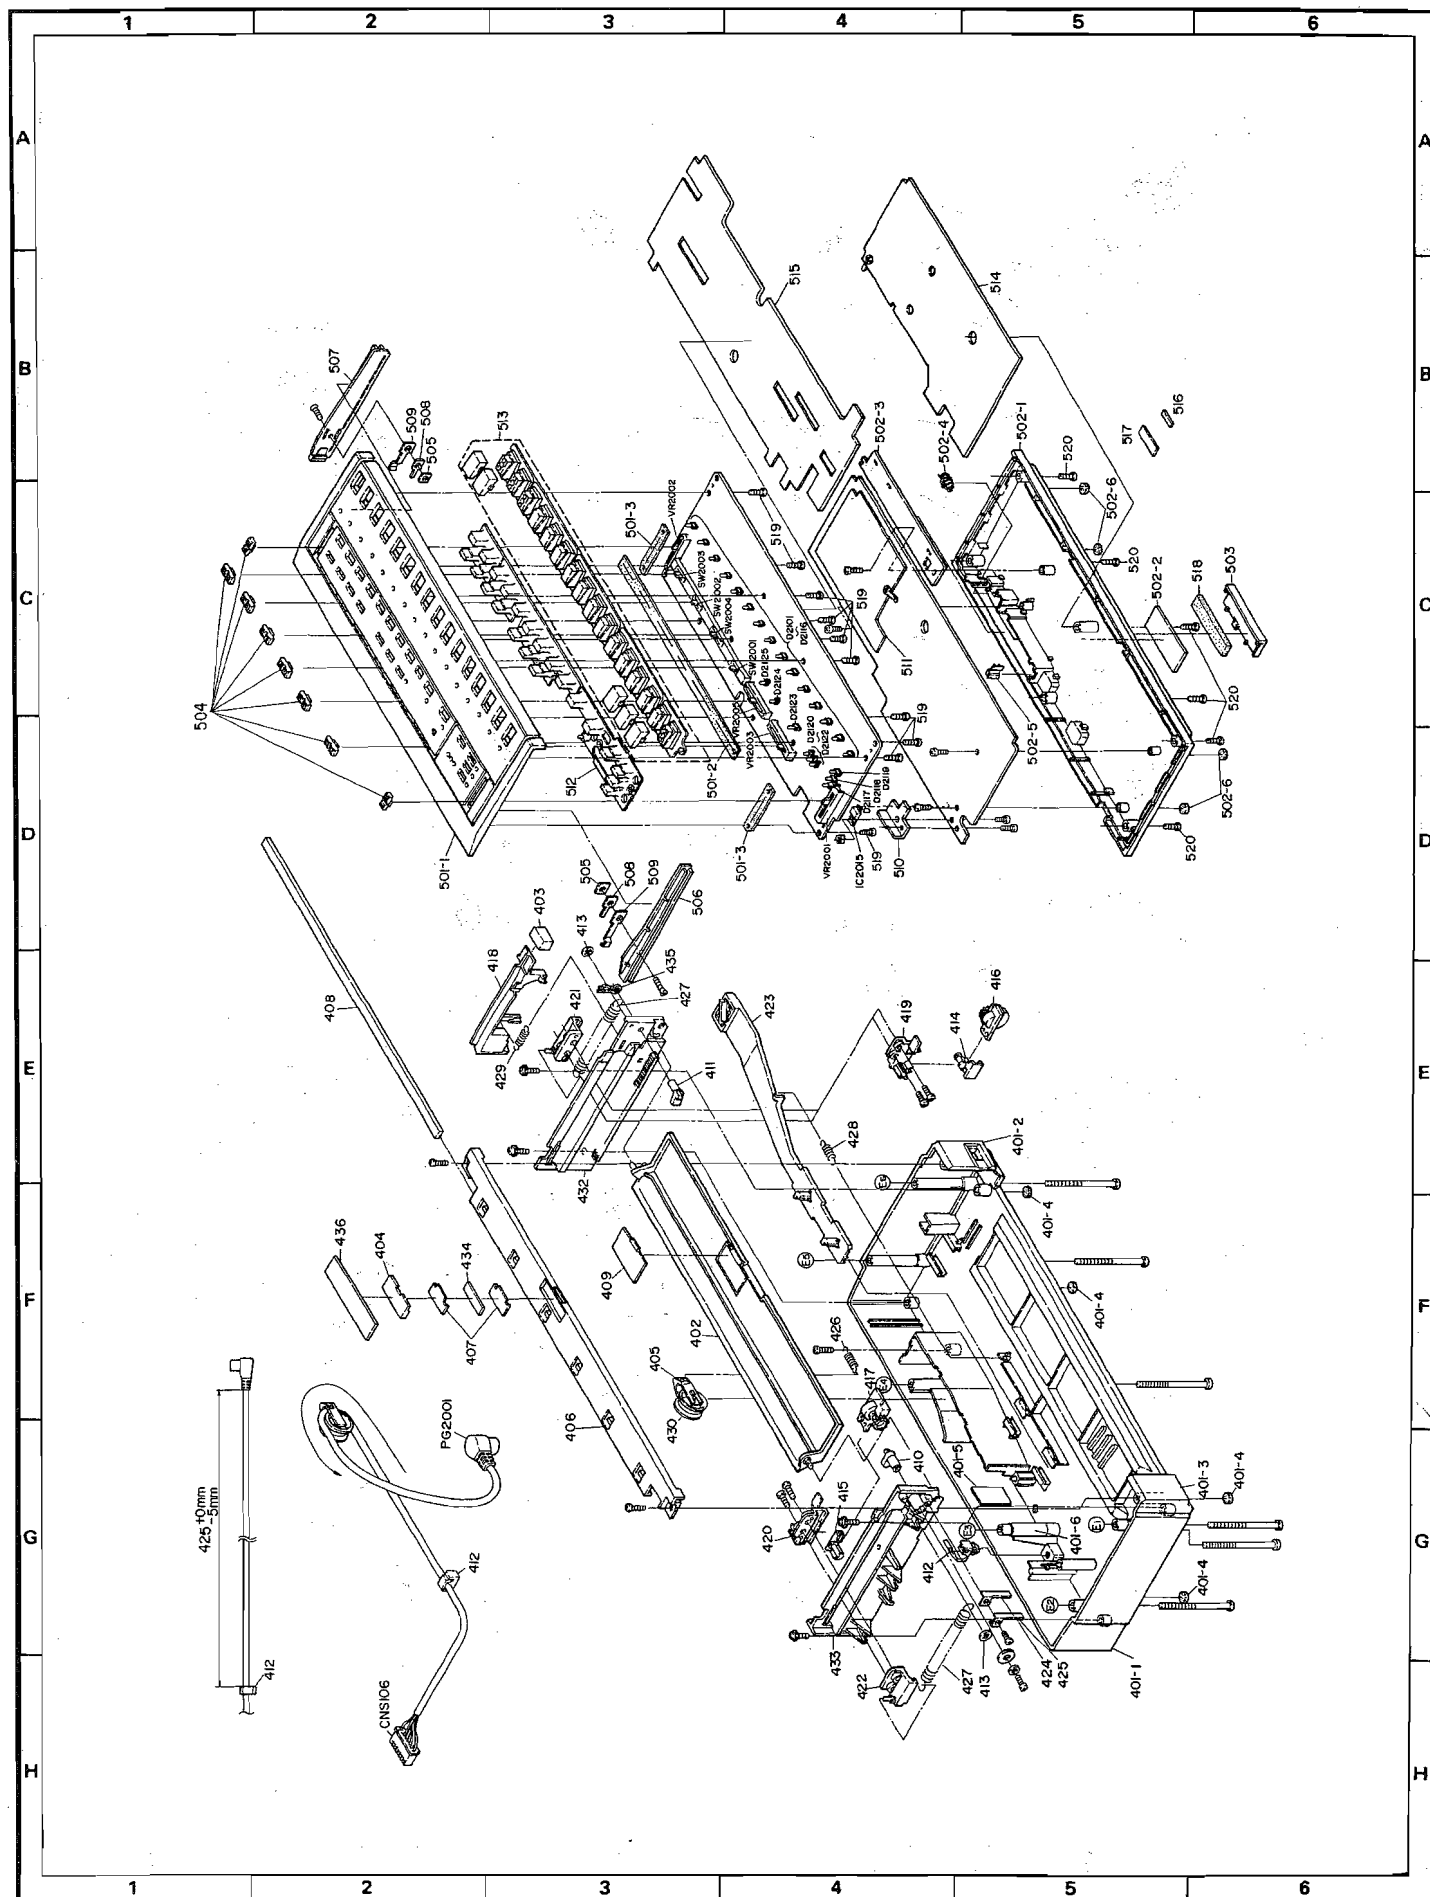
MUSIC PROCESSOR UNIT - MUSIC PROCESSOR CASE EXPLODED VIEW
